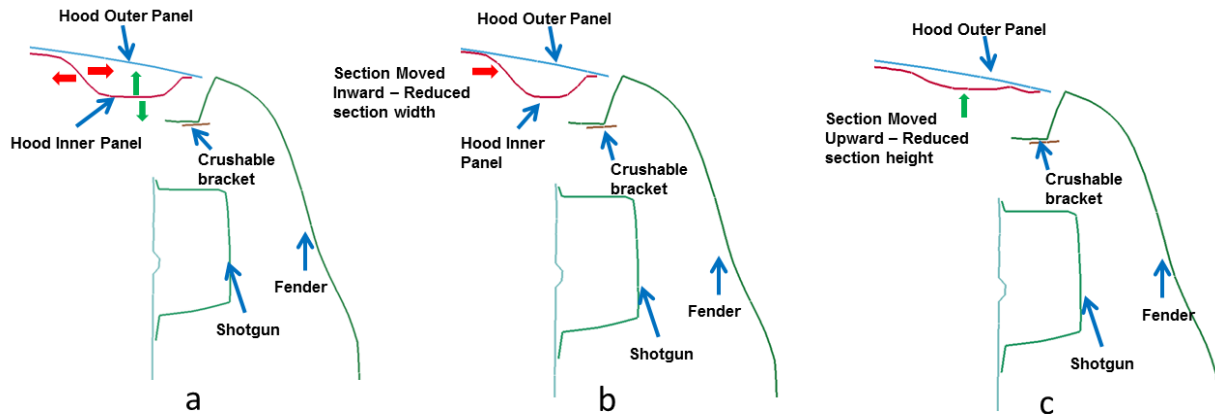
cross-sectional views with section cut for the fender, hood panels and shotgun- showing hood inner panel's section changing in width and height. a) The original cross-section b) section width reduced by moving section inward c) section height reduced by moving section upwards
